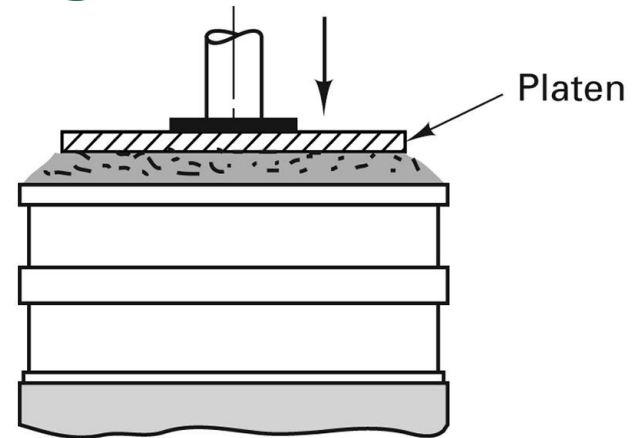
(Above) Squeezing a sand-filled mold section. While the pattern is on the bottom, the highest packing will be directly under the squeeze head.
